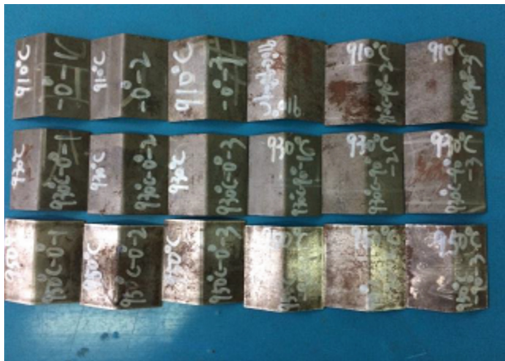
Photo of specimen after three-point bending test of CR1300/2000HS steel specimens.
